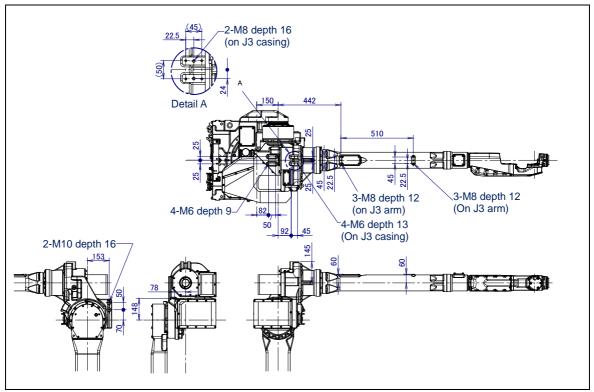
(b) Equipment mounting surfaces (M-710iC/12L)
